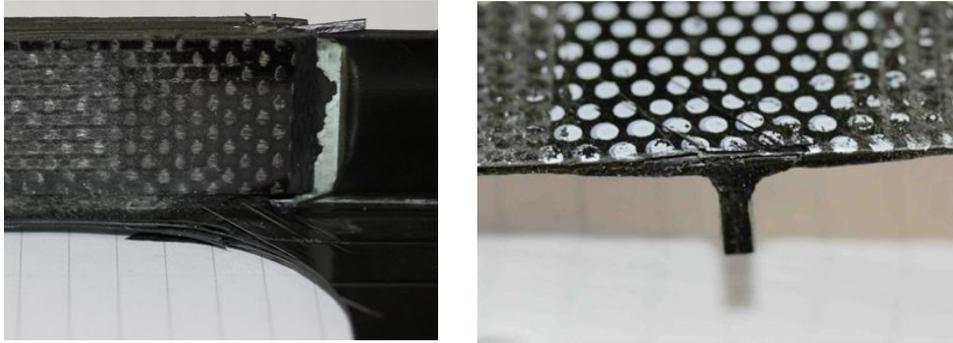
SP specimens, failure modes. Left: Skin cutout, stiffener-loaded end (specimen #3 shown). Right: Delamination, skin-loaded end (specimen #3 only).
